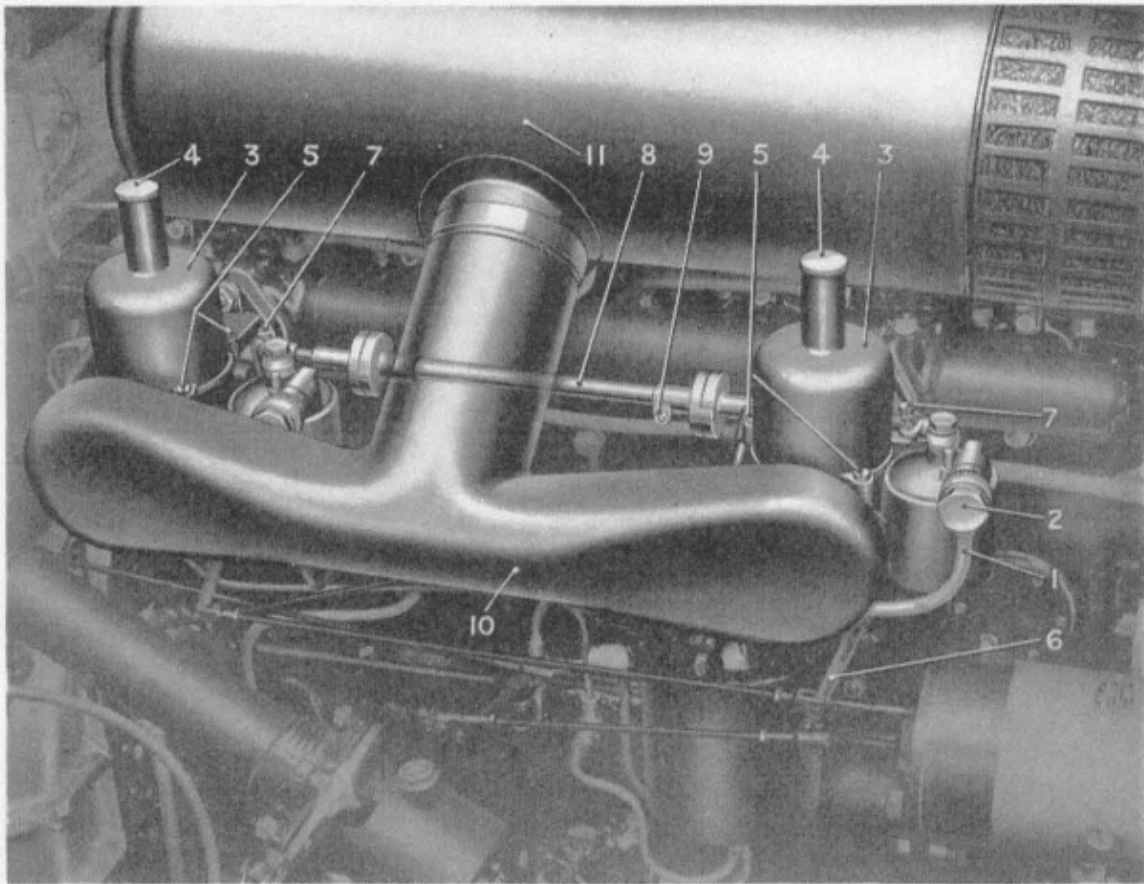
CARBURETTERS IN POSITION ON ENGINE.
